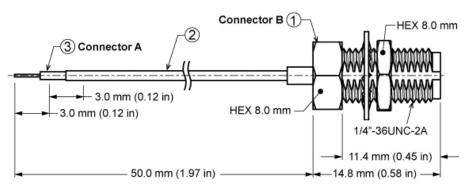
Product Dimensions for the CSS-SGAF-050-STTN Cable Assembly
